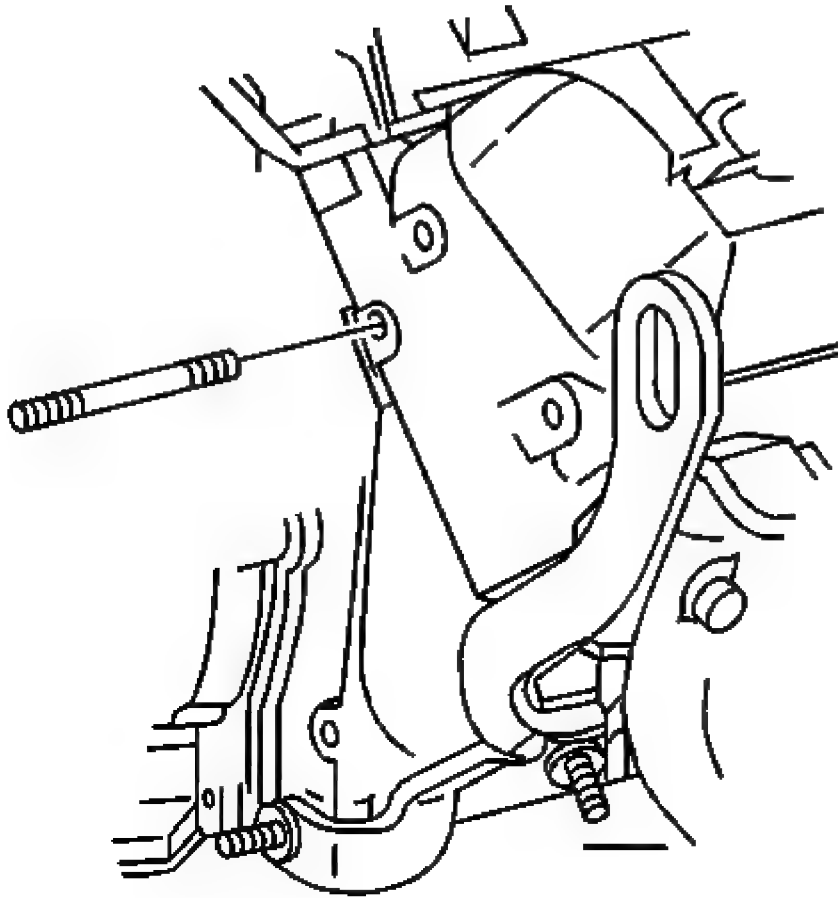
Locating Power Steering Pump Mounting Bracket Stud
